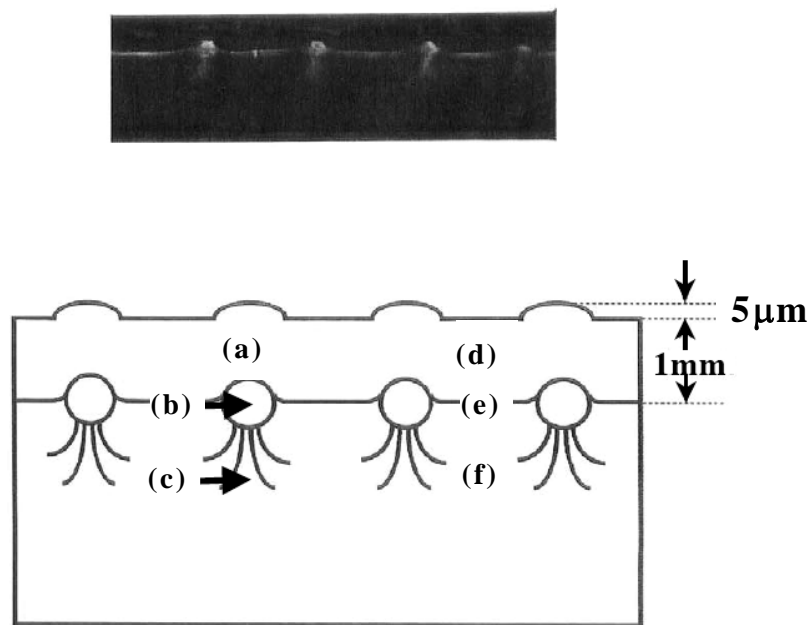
Photograph and its schematic representation of the cross section of injection molding cut in direction perpendicular to concave-convex stripes for C.
